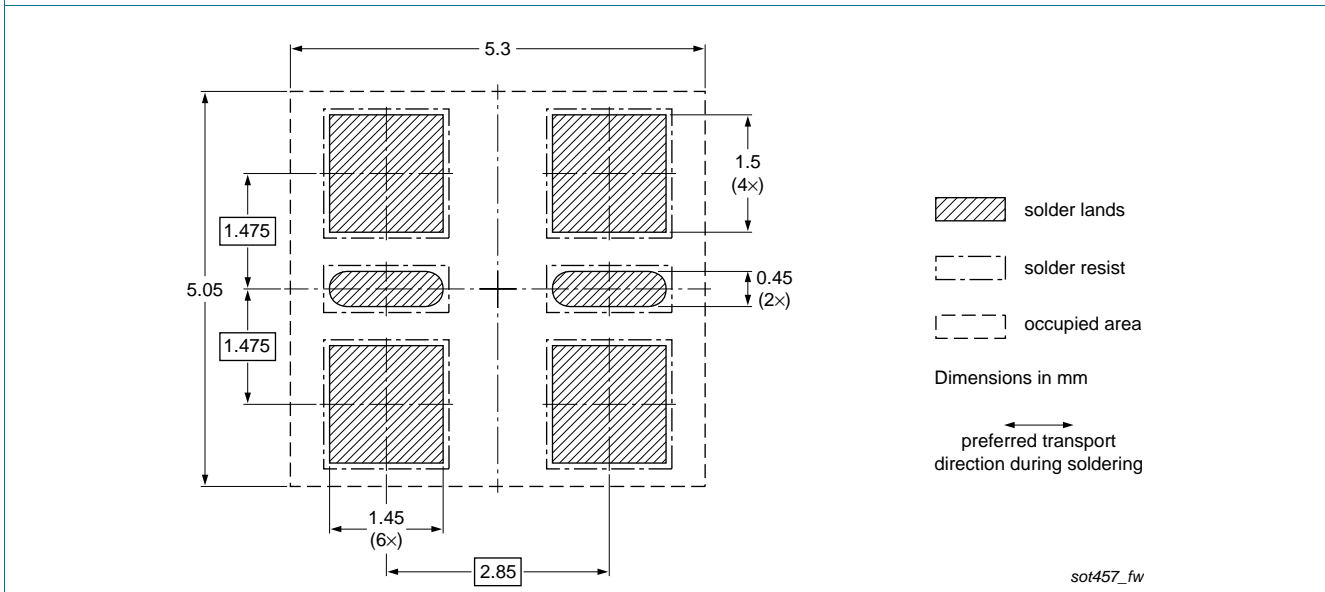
Wave soldering footprint for SOT457 (TSOP6)
